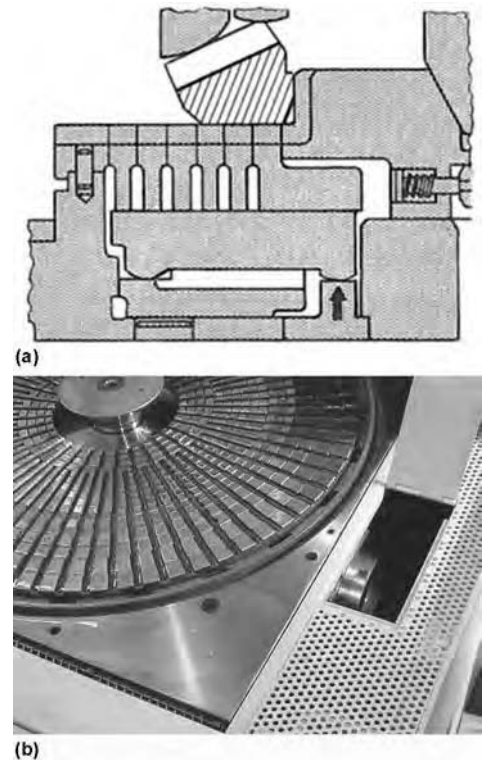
(a) Schematic diagram illustrating the mechanism used to control dishing. This mechanism permits the inner ring of lower die to be raised or lowered (arrow) to compensate for dishing. Source: Ref 3. (b) Actual lower die assembly showing the dial that controls the mechanism for raising or lowering the individual slotted rings. Courtesy of The Gleason Works, Rochester, NY
